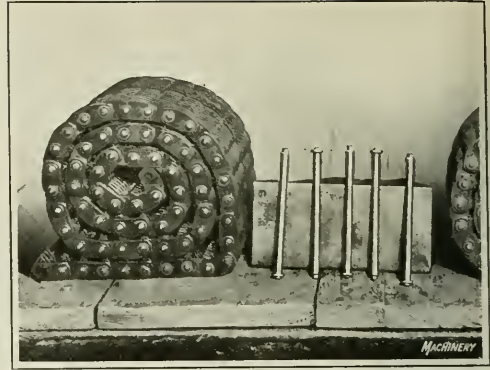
Coil of Link Chain and Pins on which the Steel Links are assembled
